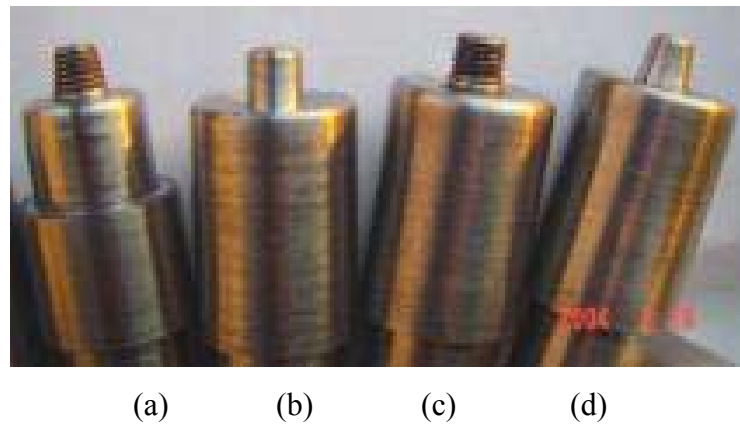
Image of CFSW tools (a) Tapered thread cylindrical pin (b) Straight Cylinder
